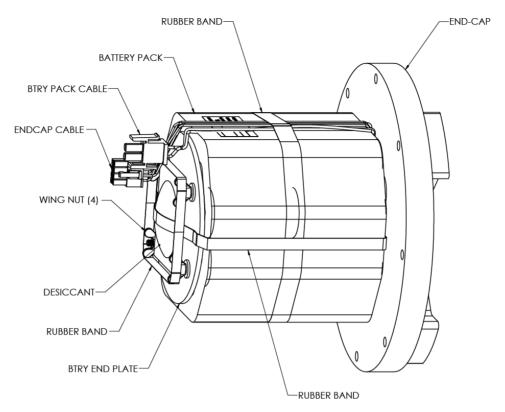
Sentinel End-cap and Battery Pack Parts Location
